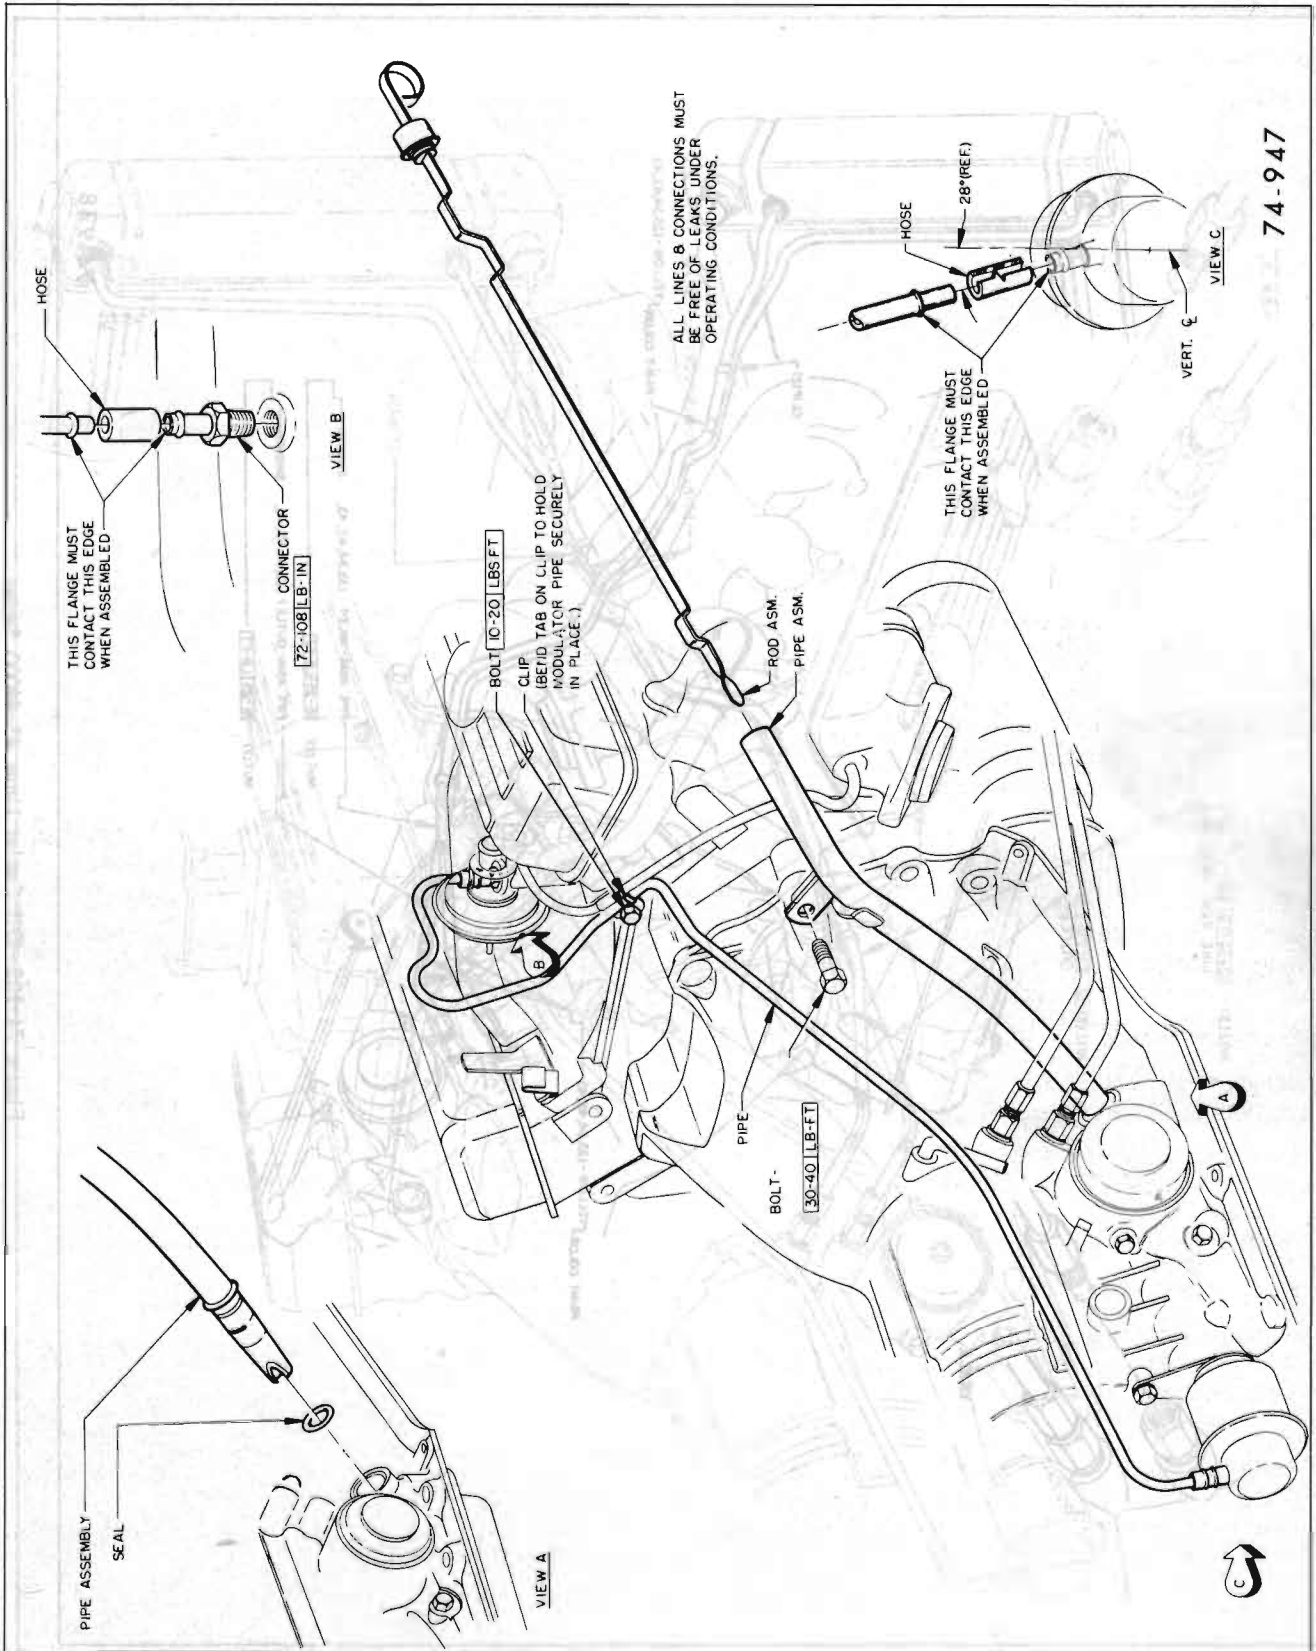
Vacuum Line and Oil Filler Pipe 43-44-45000 Series
